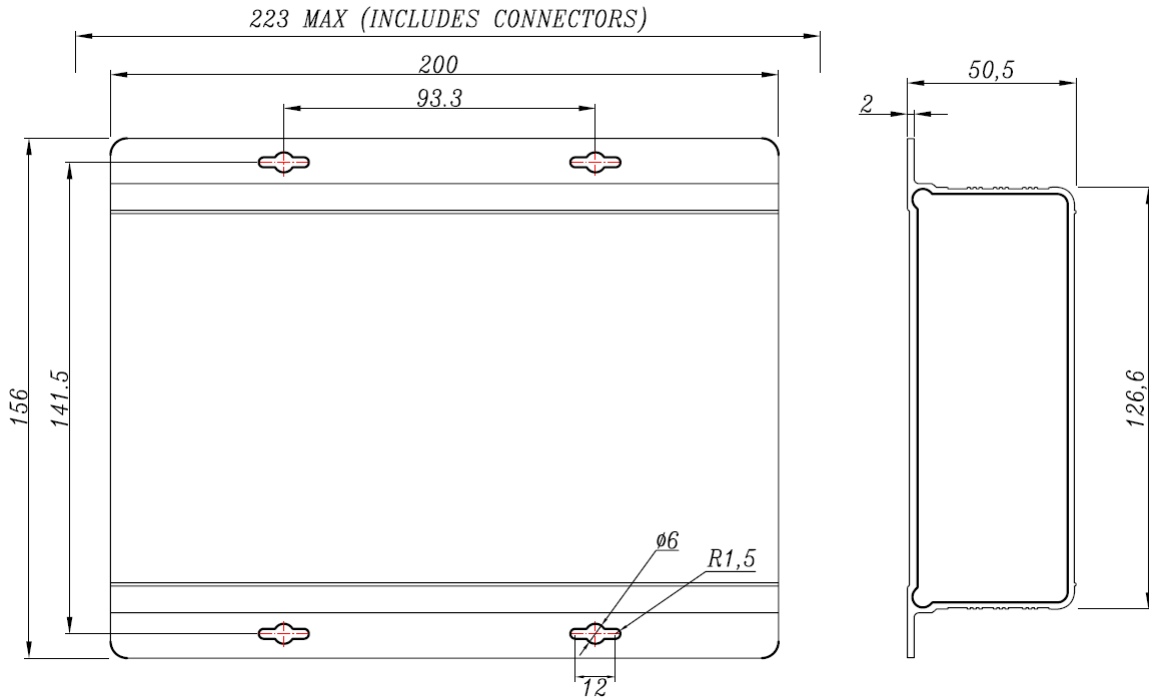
Dimensional drawings of Standalone unit (mm)
